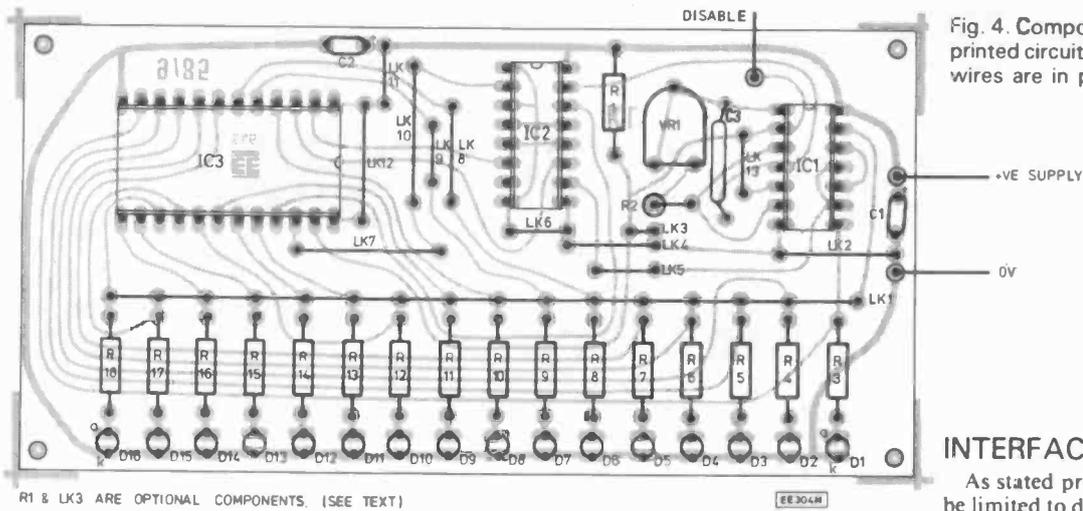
Component layout and wiring to the printed circuit board. Make sure that all link wires are in position before testing.
